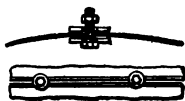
Use of clamps for holding edges of sheets in correct position for welding purposes.
